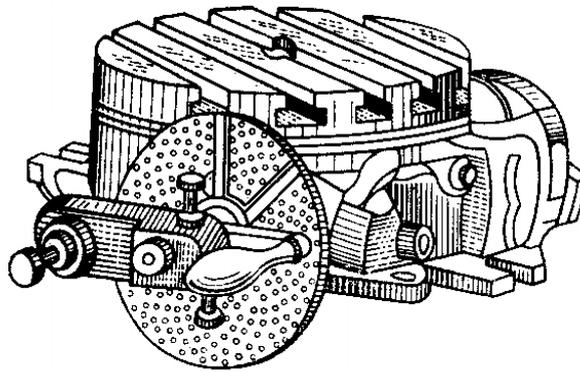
A rotary table which can be clamped or mounted on the machine bed.
